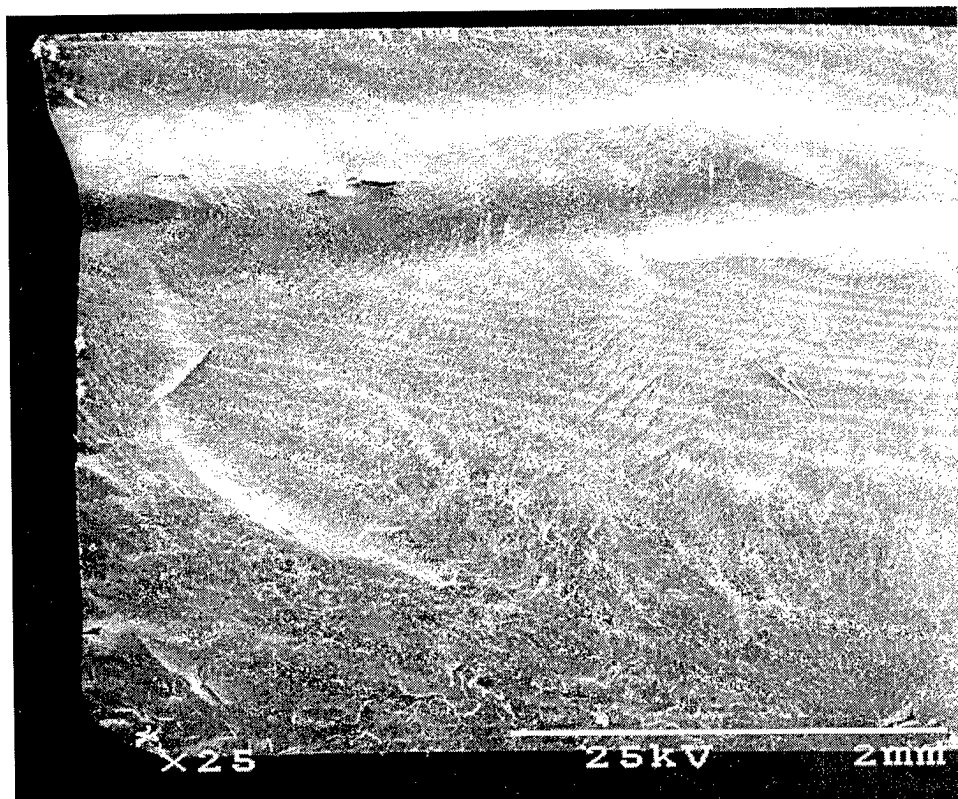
Low magnification image of the fracture surface of freeformed flexural test bars.
